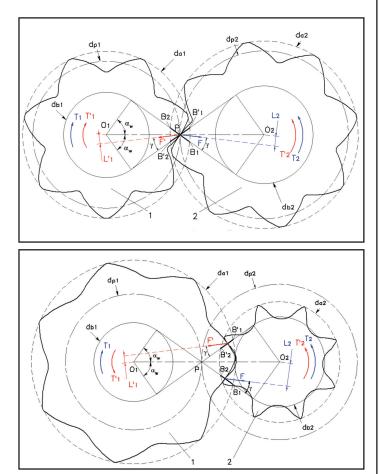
Conventional (top) and self-locking (bottom) gears; 1 – driving pinion, 2 – driven gear; blue color shows the normal driving operation, red color – the case when the driven gear becomes the driving by inertia.
